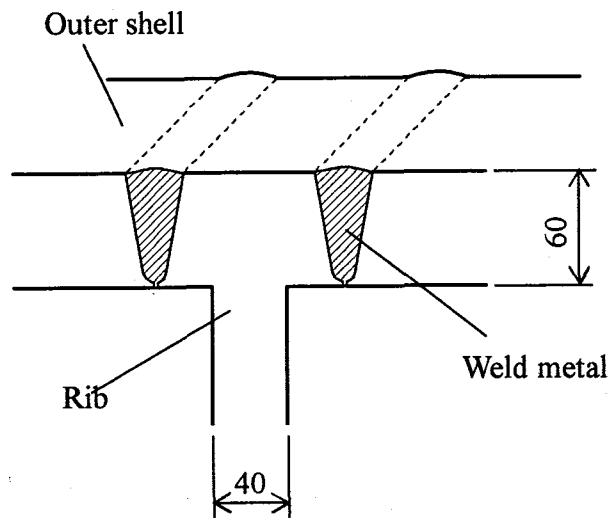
Butt Weld between Outer shell and Rib
